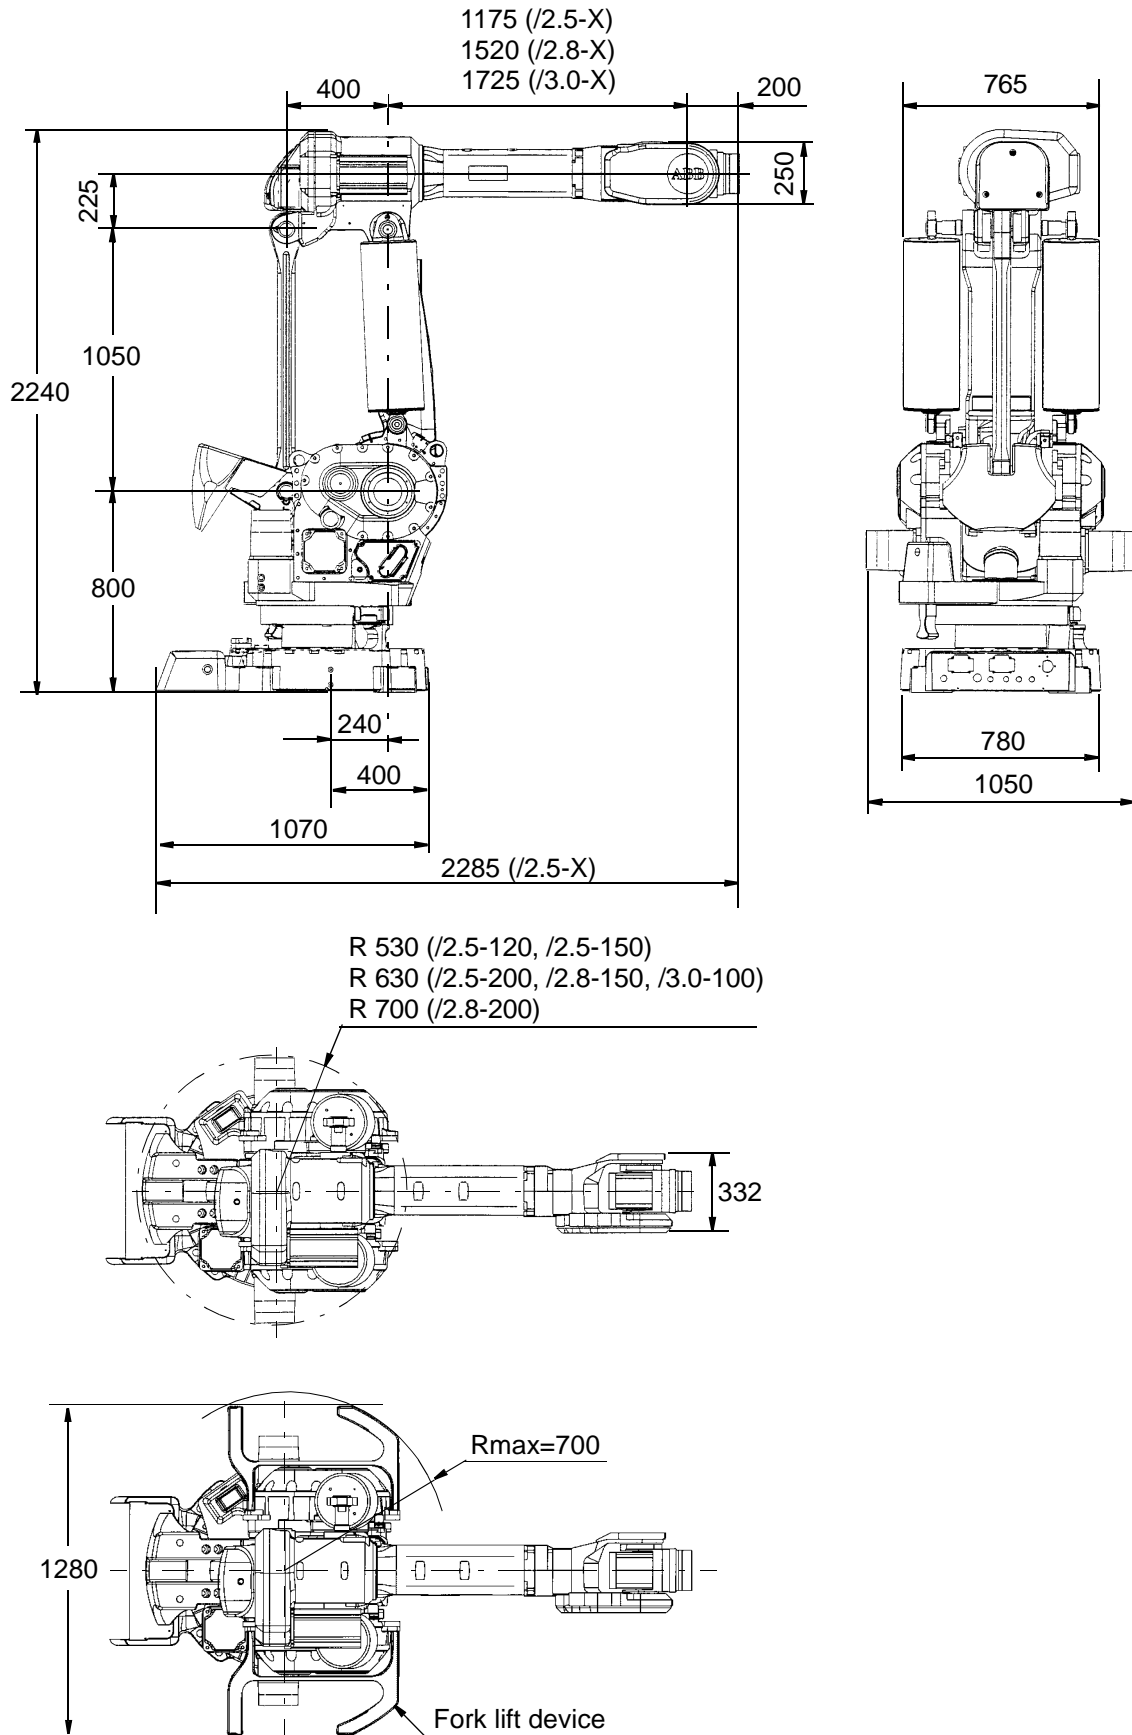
View of the manipulator from the side, rear and above (dimensions in mm).
